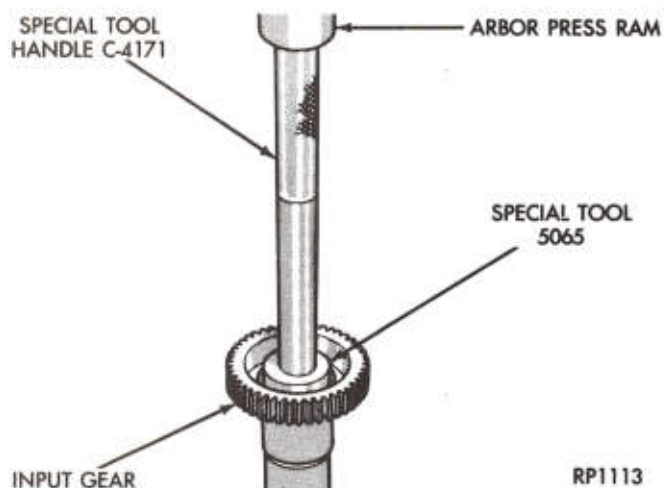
Install Mainshaft Pilot Bearing Rear Retainer
